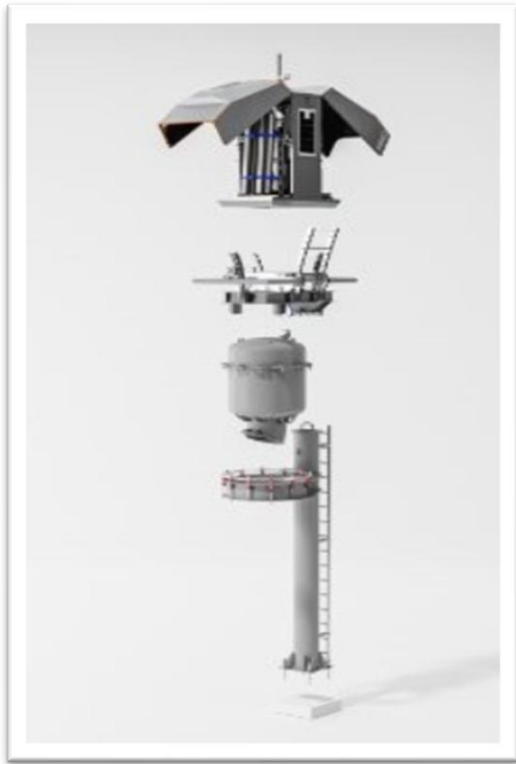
Exploded view of the O'BelIX 1.8 modular system and mast assembly.
